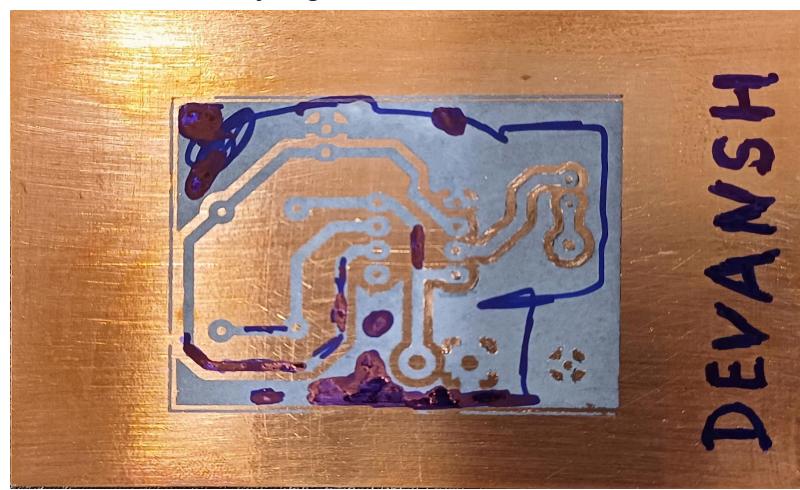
PCB After removing the top protective layer and cleaning the copper surface)
